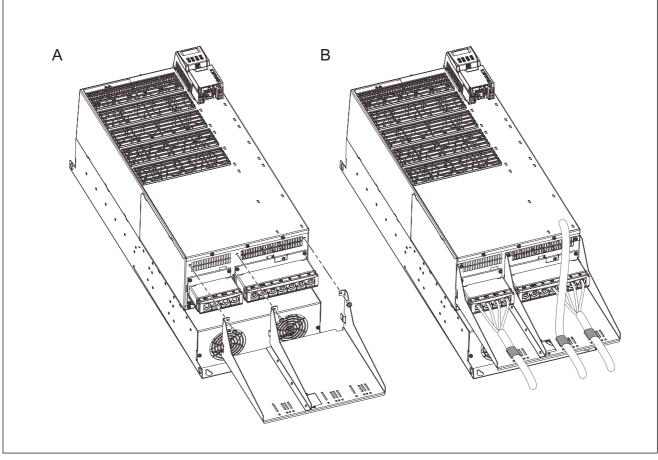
Mounting a Screening Kit on a Power Module of frame size FSF
